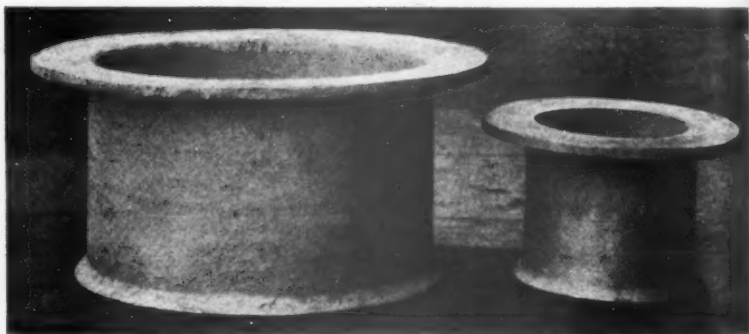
Stainless steel cast top sleeve at the left and a bottom sleeve at the right. Cast sleeves, because of their greater stiffness, have this advantage over fabricated sleeves made from relatively light gauge material.
